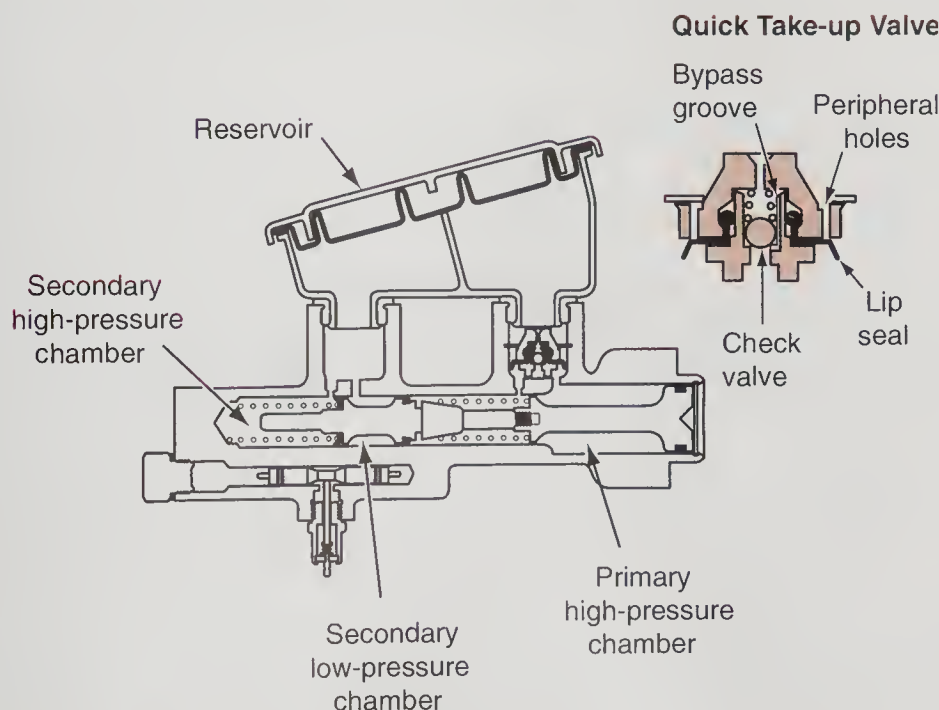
The quick take-up valve serves the primary piston for low-drag calipers.
